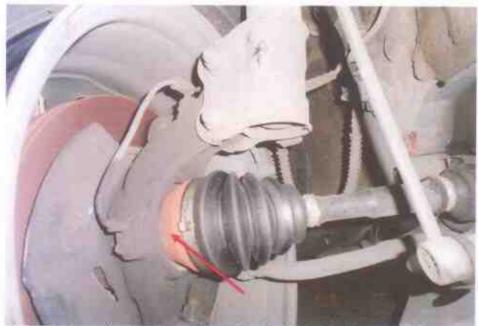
shows the dislodged drive shaft of the Motor Taxi front right wheel as a result of the accident's impact collision.
